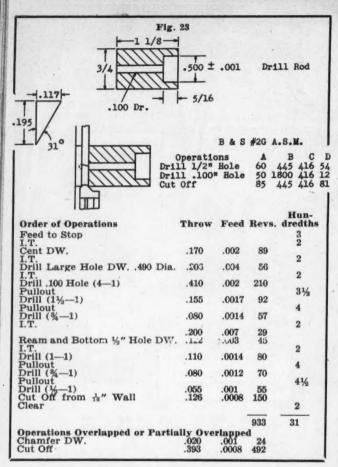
shows a 0.500 ± 0.001 inch counterbored hole and a 0.100 inch diameter hole which is 47/64 inch deep.
